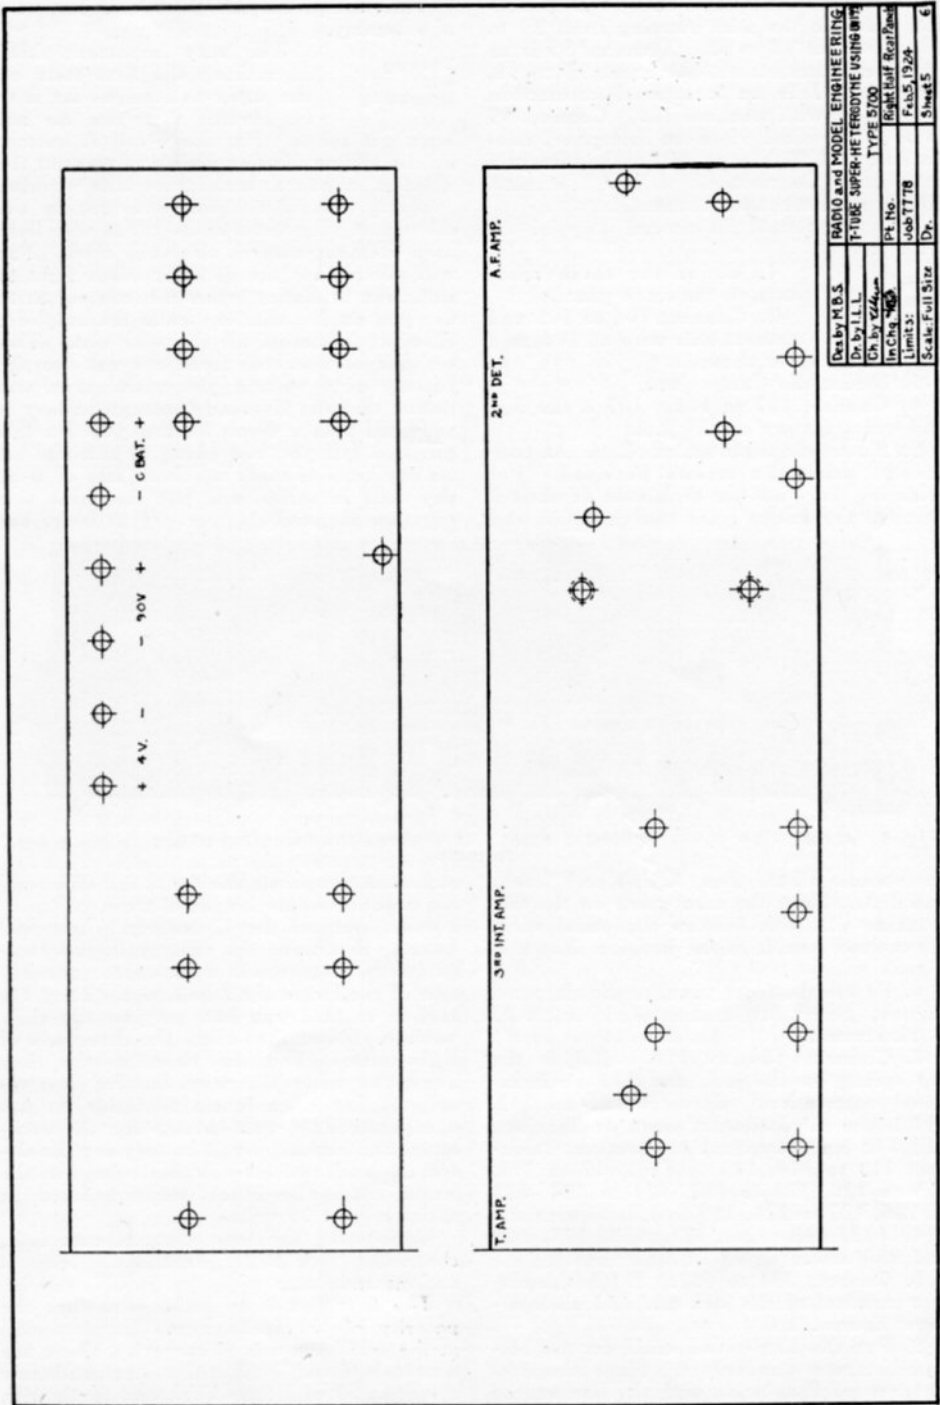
Half-scale drawing of the right hand half of the tube panel and the sub panel. All dimensions should be doubled and transferred to the panel
